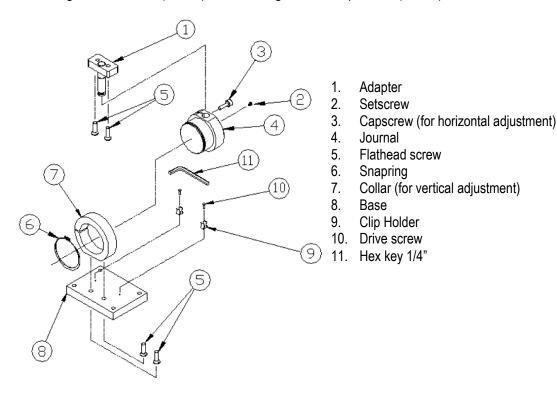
Explosion view of the Adjustable Mounting Base (E-MB)
